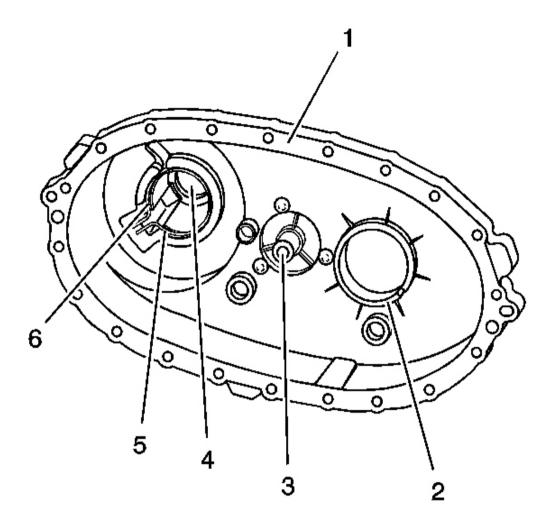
Rear Case Half Components Courtesy of GENERAL MOTORS CORP.
